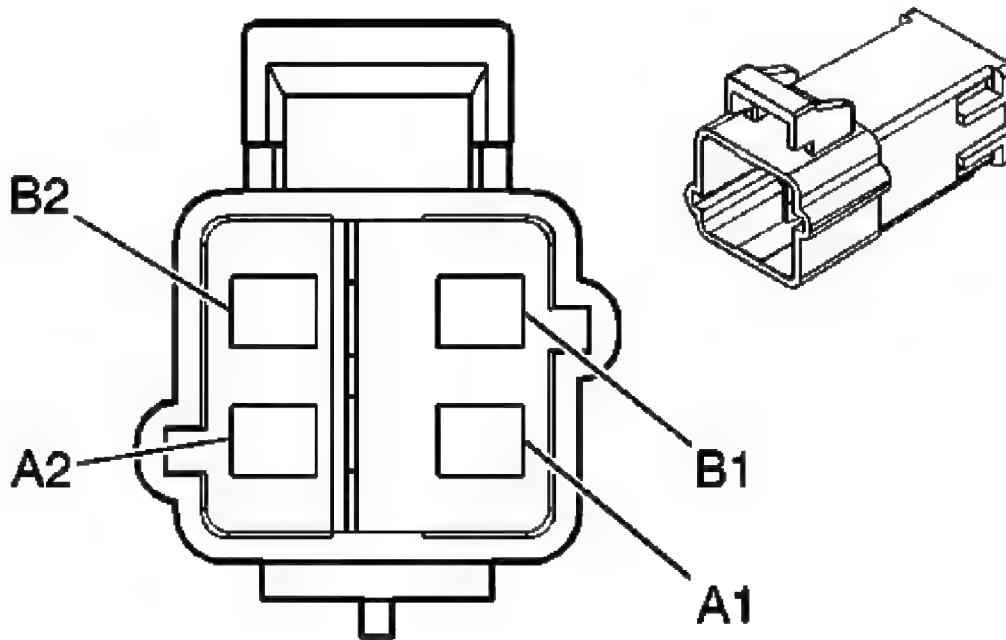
Inflatable Restraint Steering Wheel Module Coil C3 Connector End View
